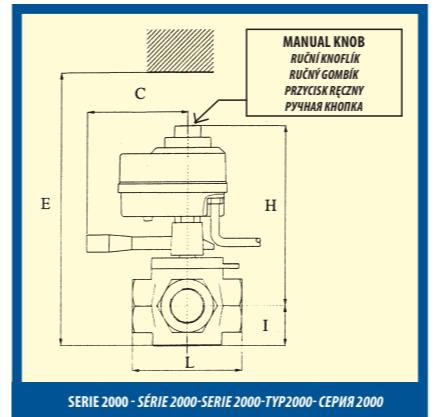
Overall dimensions - Obr. 2 Celkové rozměry - Obr. 2 Wykres rozmiary - Rys. 2 Wymiary całkowite - Рис. 2 Общие размеры
